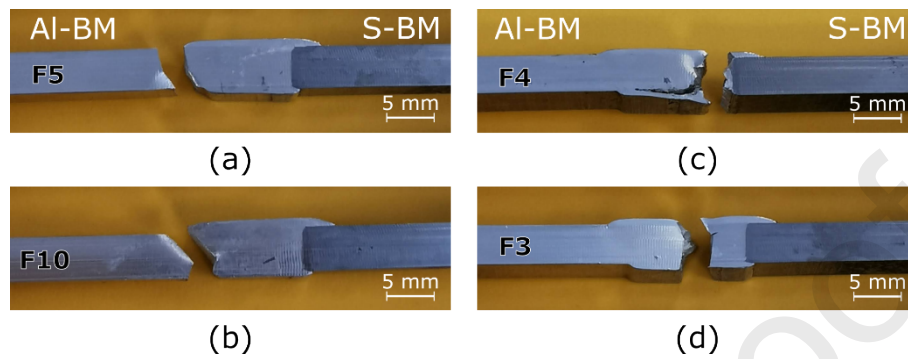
Photographs revealing the fracture path of selected specimens following fatigue testing; (a) specimen F5, (b) specimen F10, (c) specimen F4 and (d) specimen F3.
